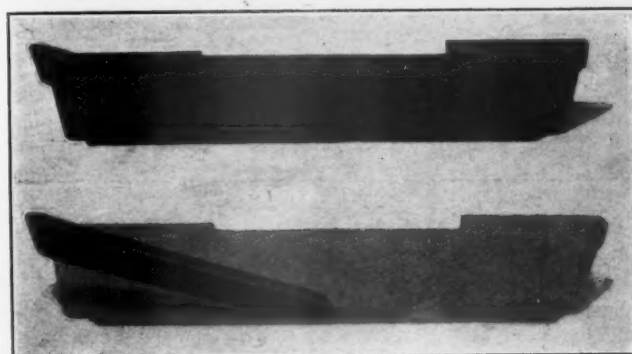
TOOL HOLDER FOR HIGH SPEED TOOL. LOWER VIEW SHOWS POSITION OF ROUGHING TOOL.
